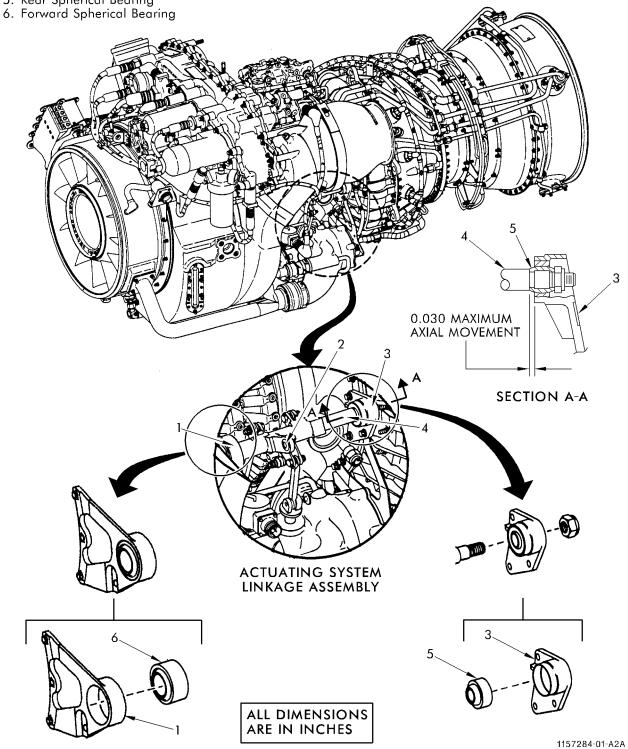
Actuating System Linkage Assembly (Typical); Inspection
